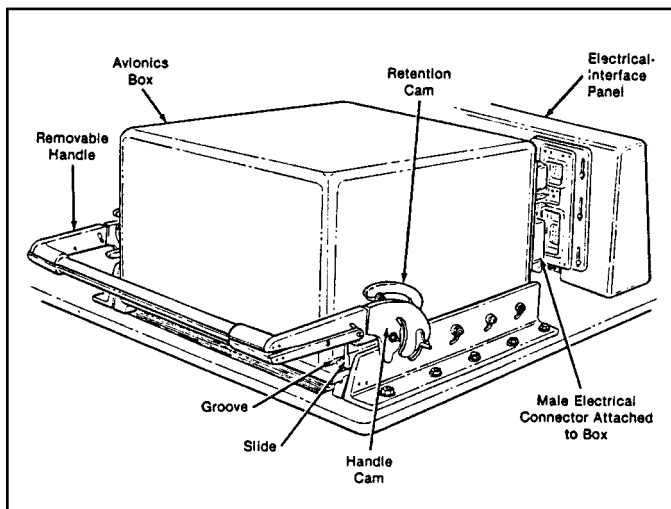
An avionics box mates with electrical connectors in the rear and is locked in position on the cold plate when it is installed with the latching mechanism.
